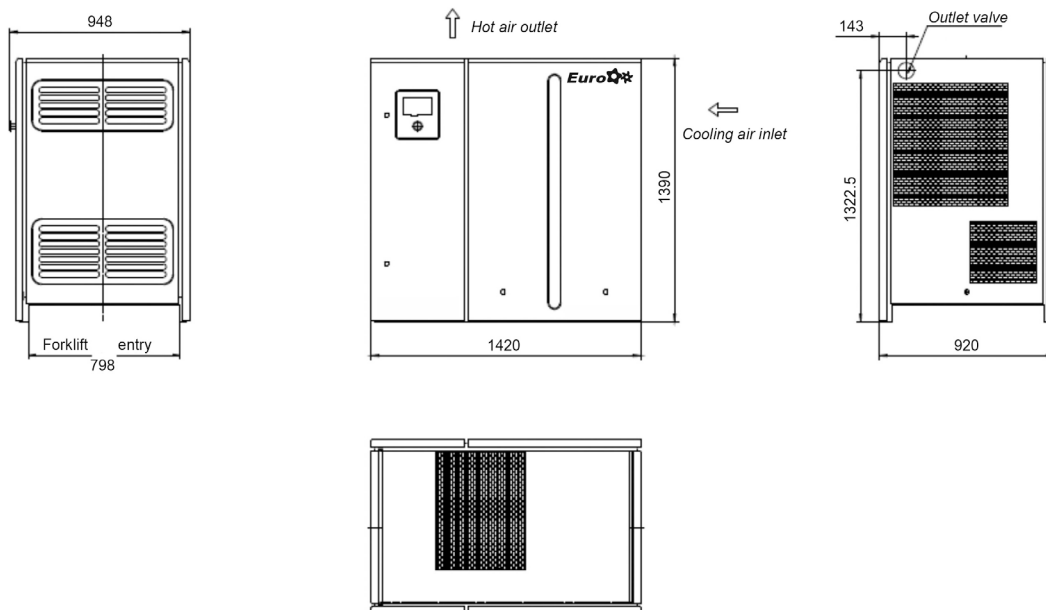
Outline Dimensions of ZS400 & ZS500 Series II
